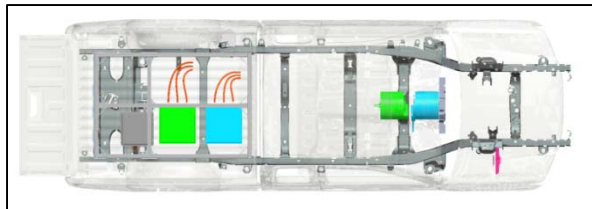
Locations of the drive motor, generator, and motor controller units. The front of the truck is to the right.
